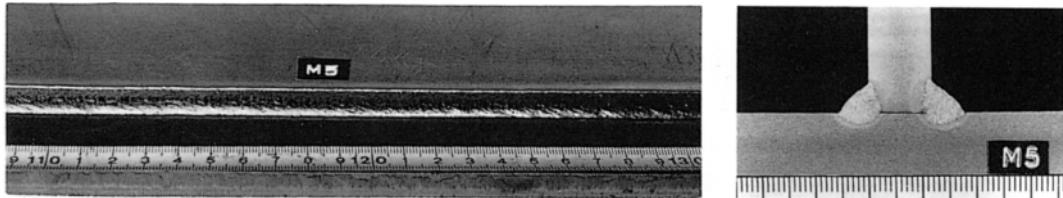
Bead appearance and cross-sectional view of a fillet weld (MX-200, 1.2 mmØ, 280 Amp. 28-32 Volt, 50 cm/min)
